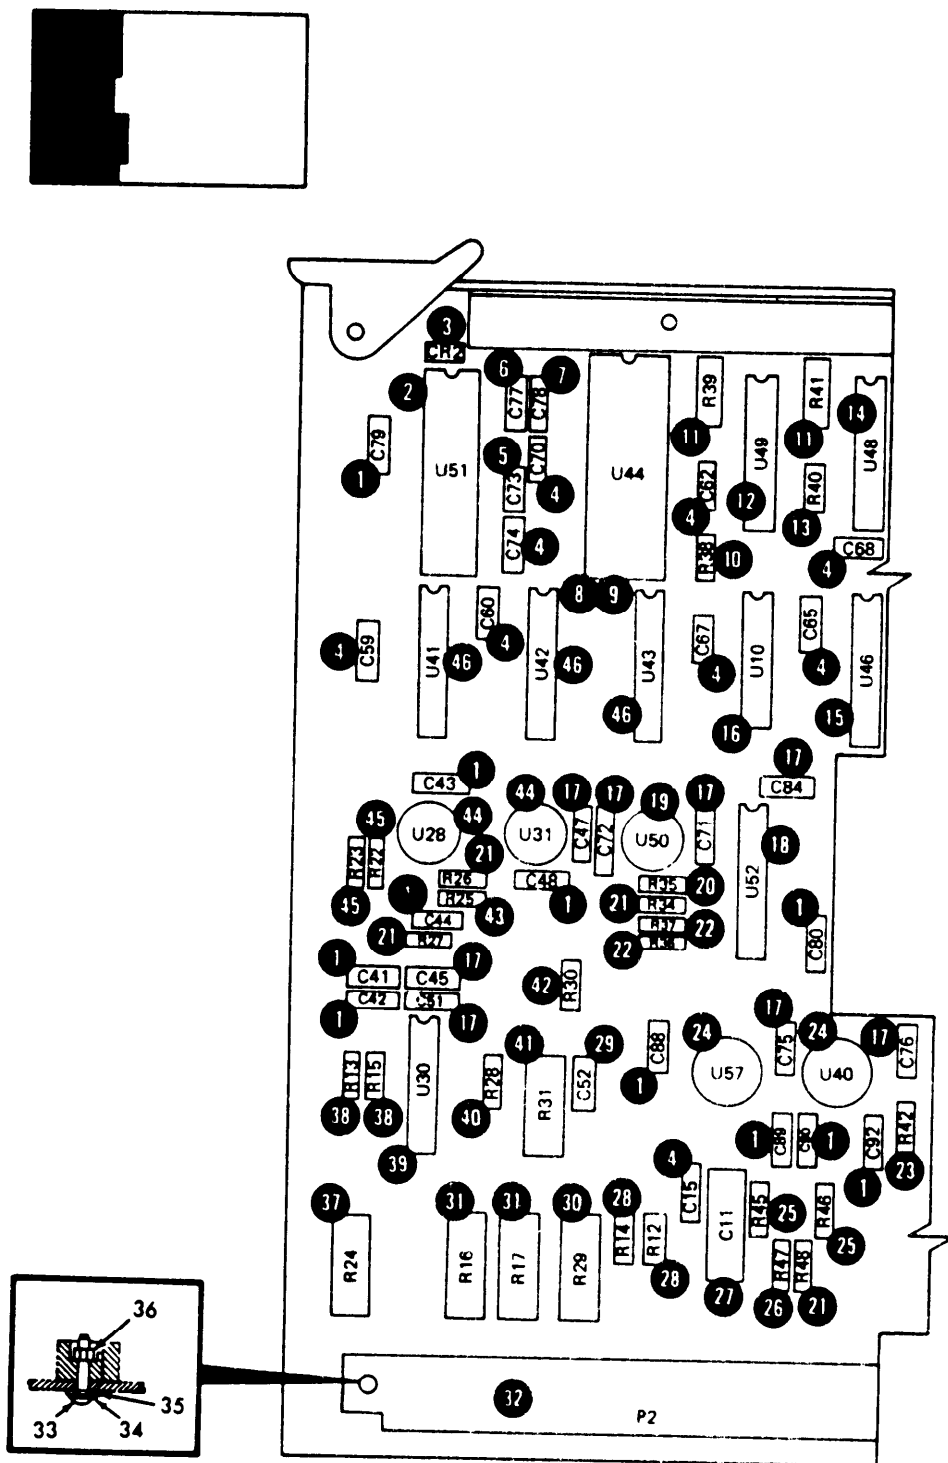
TRU-FCS SIMULATOR CIRCUIT CARD ASSEMBLY A13
